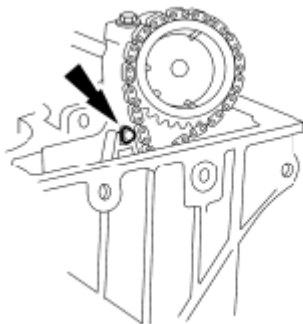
Locating RH Cassette-To-Cylinder Head Bolt
